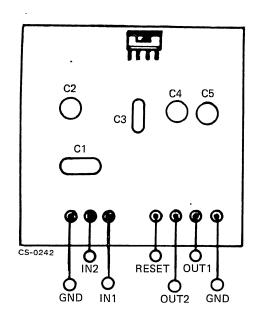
P.C. board component layout of fig. 2 (1: 1 scale)
